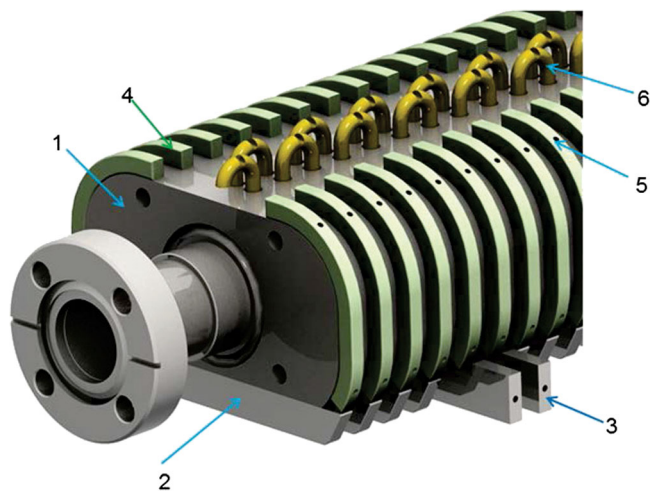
SCU1 undulator upper magnet core. Core components: core body (1); magnetic poles (2); magnetic poles with the end tabs (3); G10 side spacers (4); spring pins (5); conductor turn around pins (6). The flanged pipe is for liquid helium cooling.
